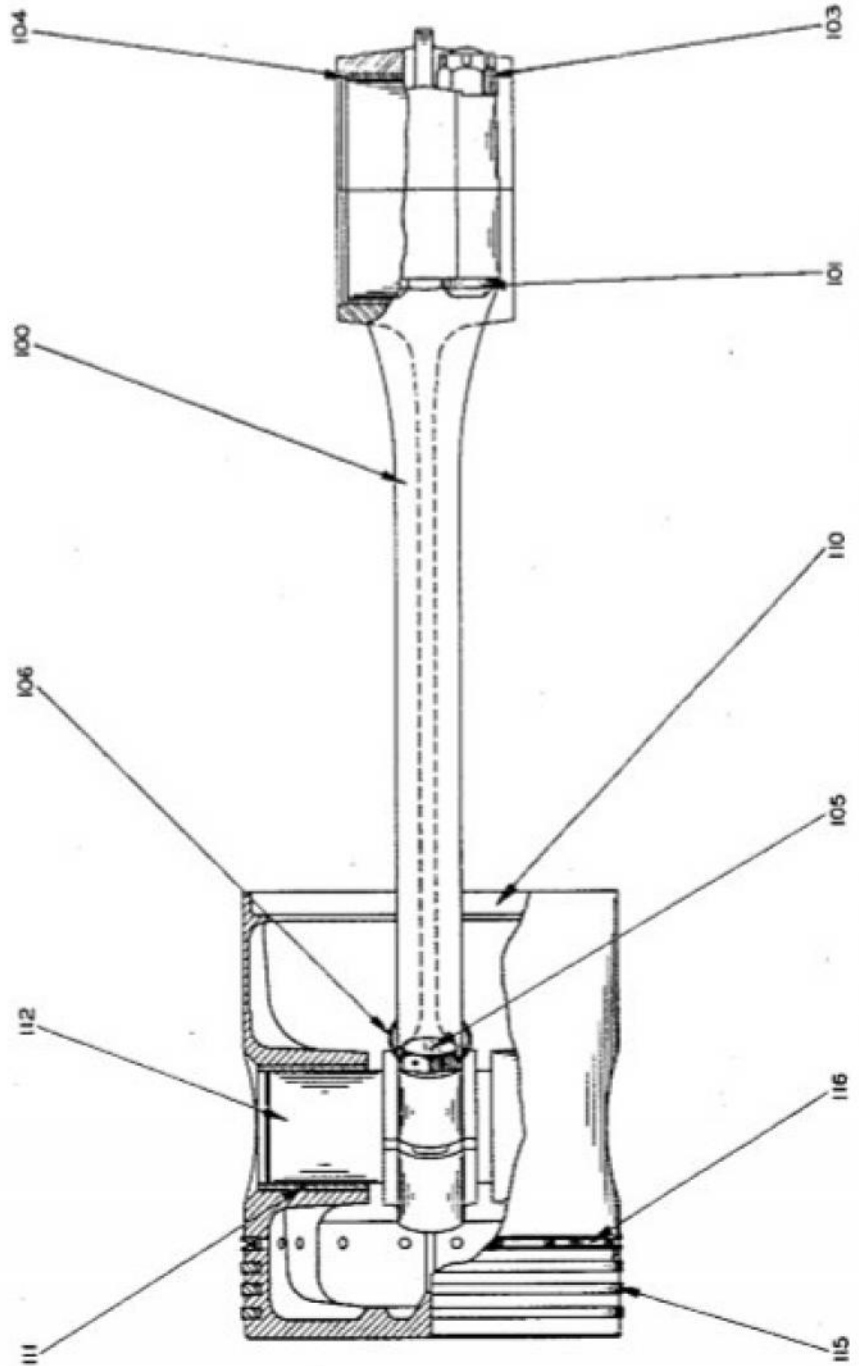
Cross Section through Connecting Rod and Piston Assembly
